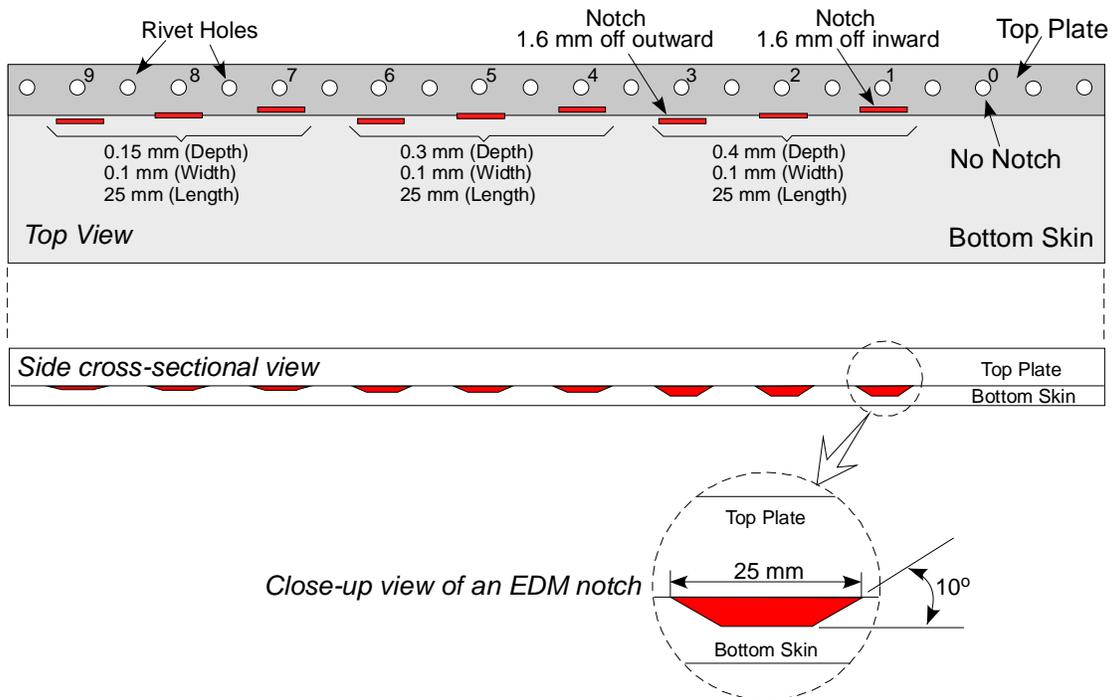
Detailed schematic drawing for the EDM notched test specimens.
